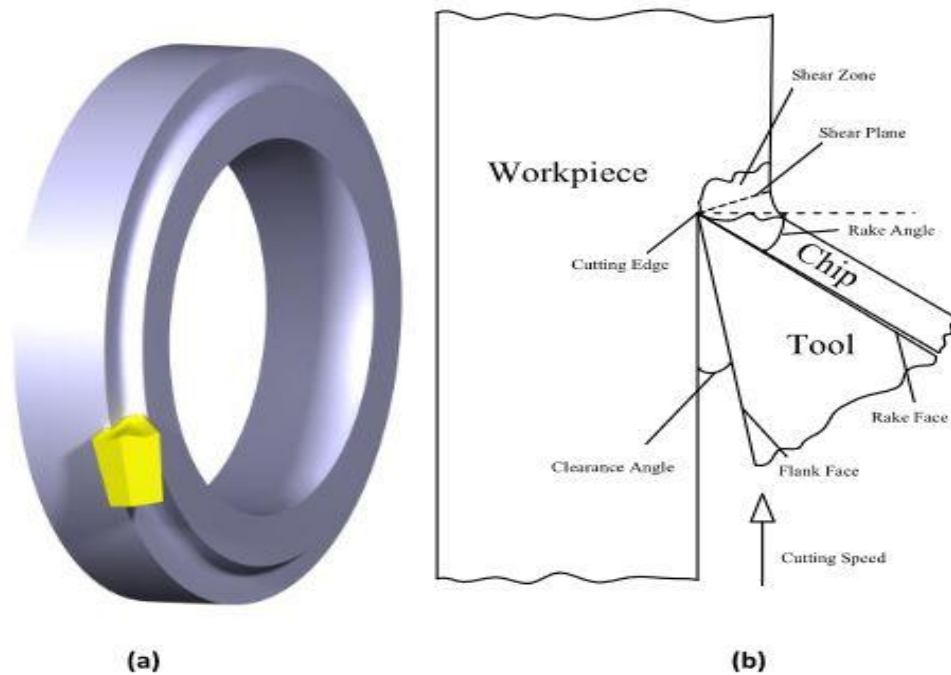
A 3-D geometric model of an insert cutting a workpiece in turning.
